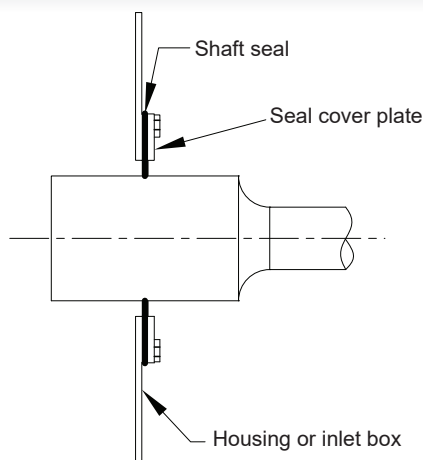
B: FLOATING GASKET SHAFT SEAL
